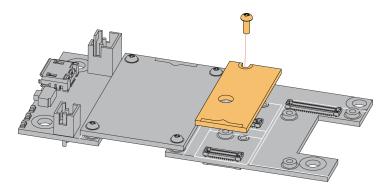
RAK1910 WisBlock GNSS Location Module Mounting
